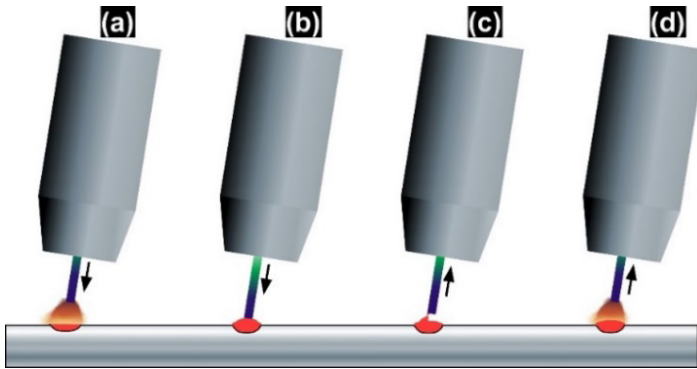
Cold metal transfer welding process and electrode wire movement.
